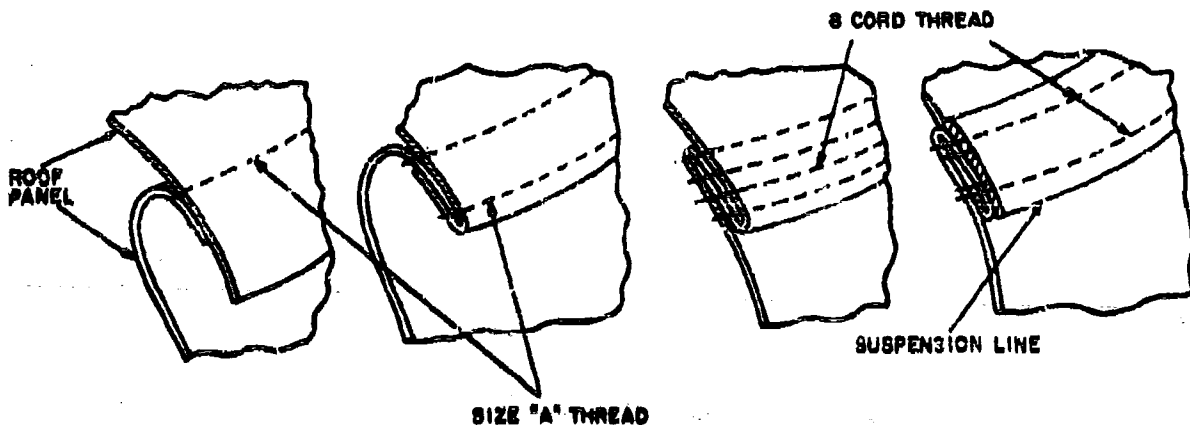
Typical Joint Construction of Roof Panels, Ribless Guide Surface Type
